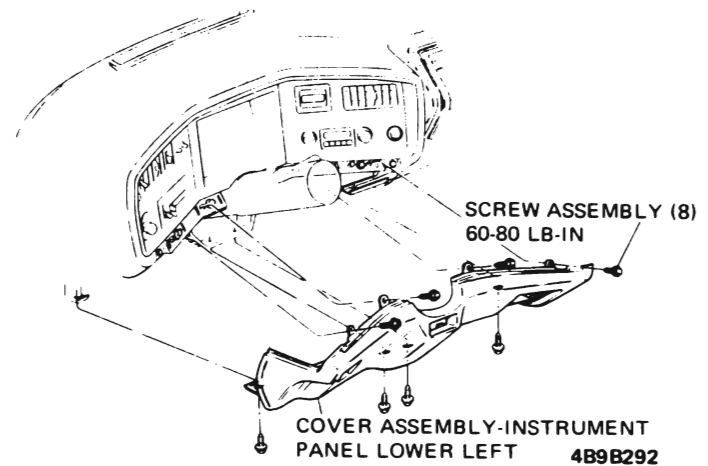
B-234 Instrument Panel Lower Left Cover Assembly
